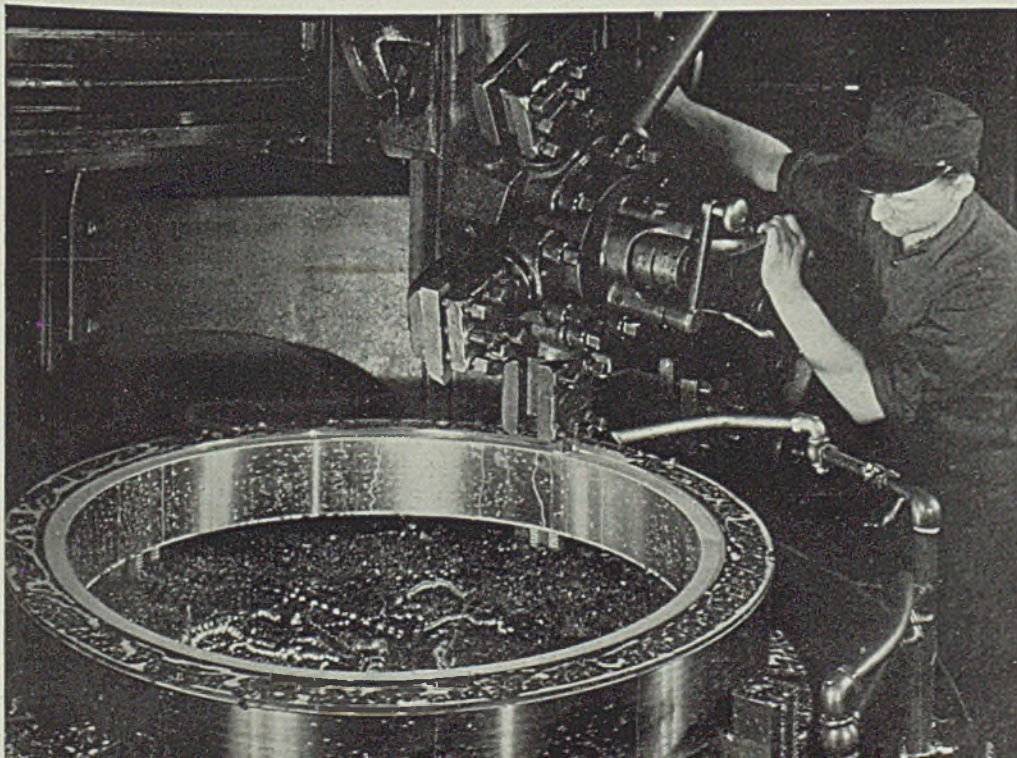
Inherent "flywheel effect"—often unrecognized but none the less important in many machine tools—is well exemplified by the revolving table of the Bullard vertical turret lathe, here shown in the act of machining a big steel ring gear blank at the Westinghouse in Pittsburgh.
